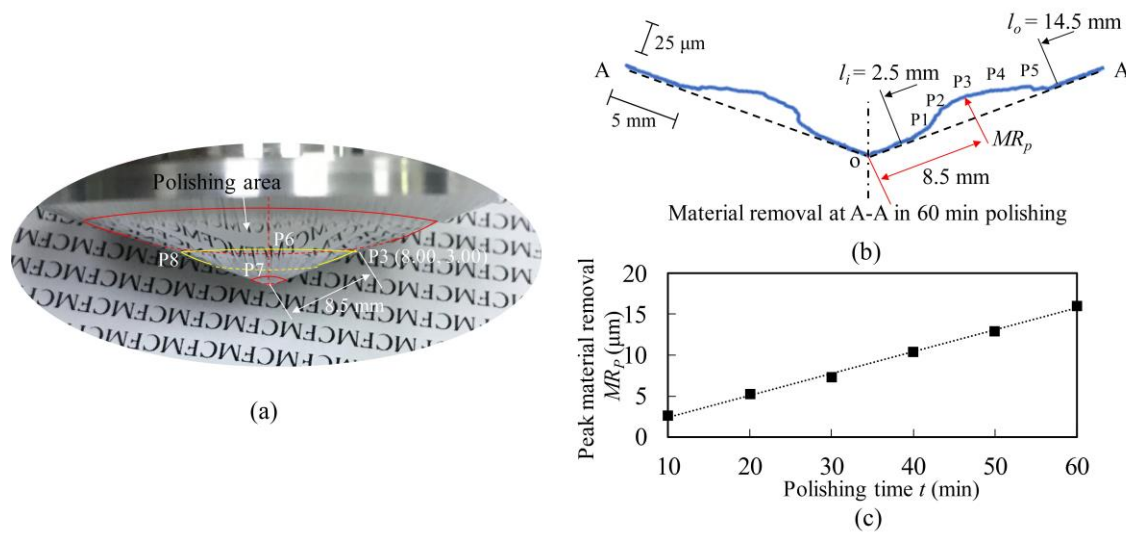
(a) The polished workpiece, (b) surface profile, and (c) the peak material removal.
